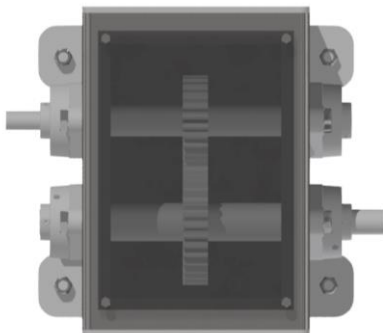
3D model of the dedicated gearbox module with a gear ratio of 1.23 – top view
